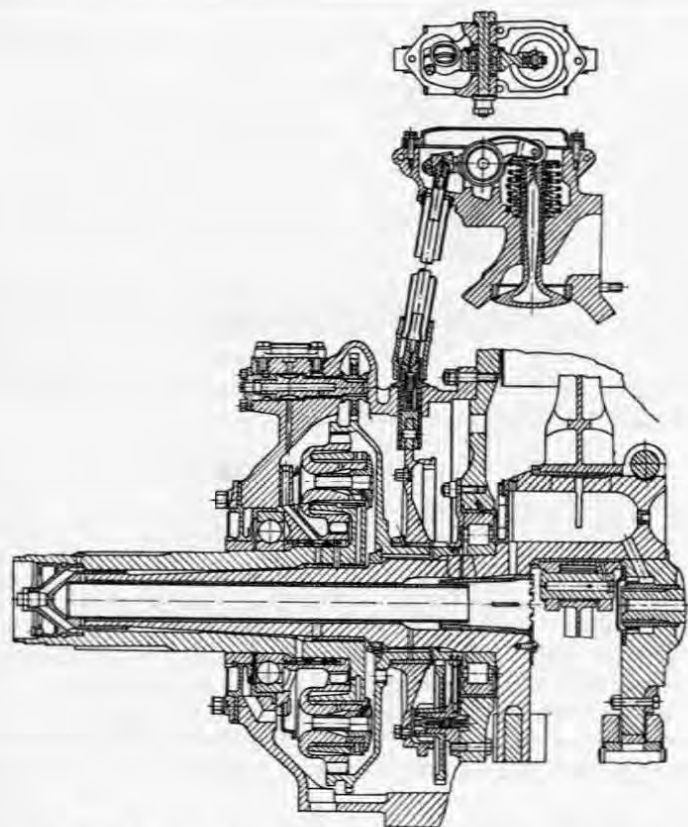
Camshaft drive at the Wright Cyclone aircraft engine.
